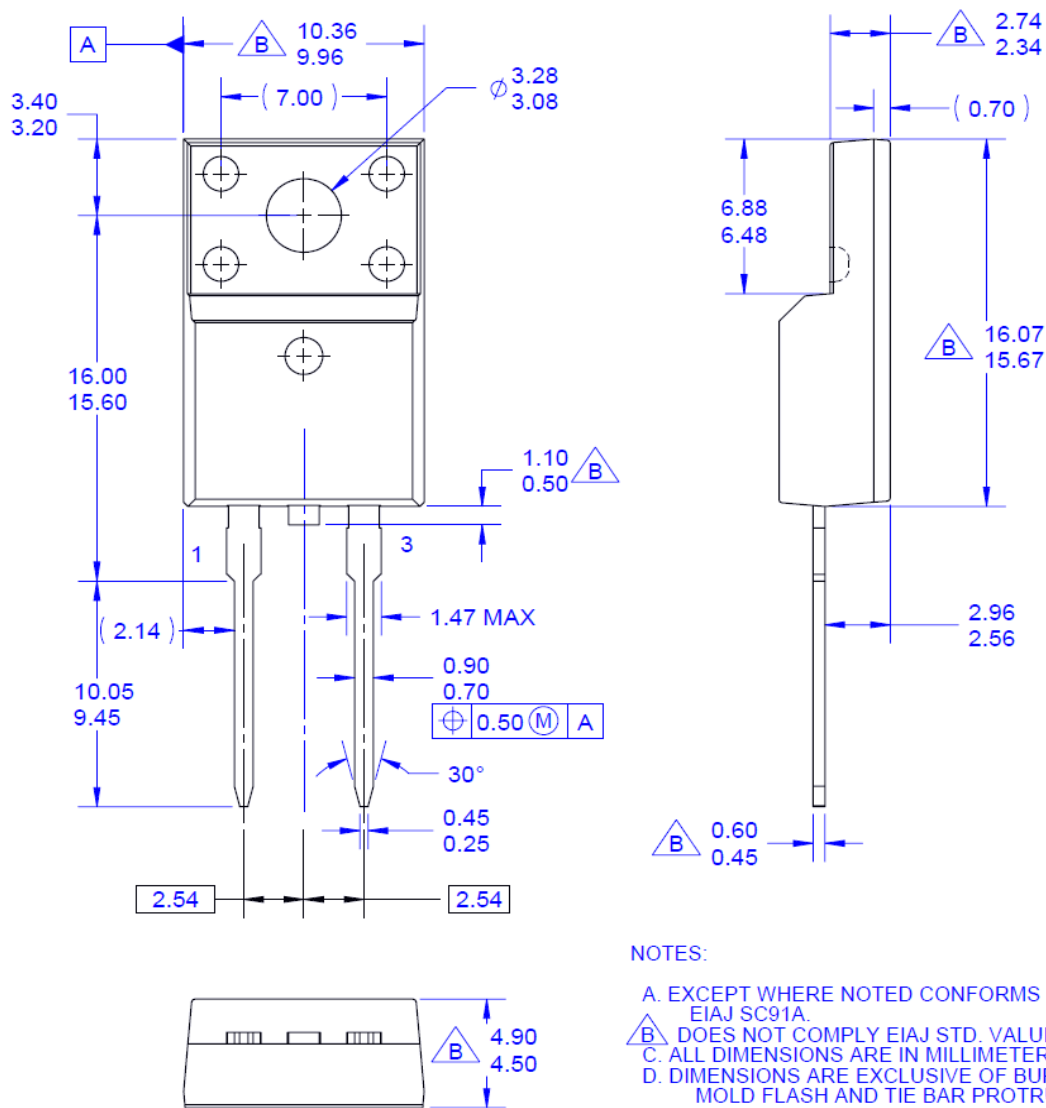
TO-220F 2L - 2LD; TO220; MOLDED; FULL PACK
